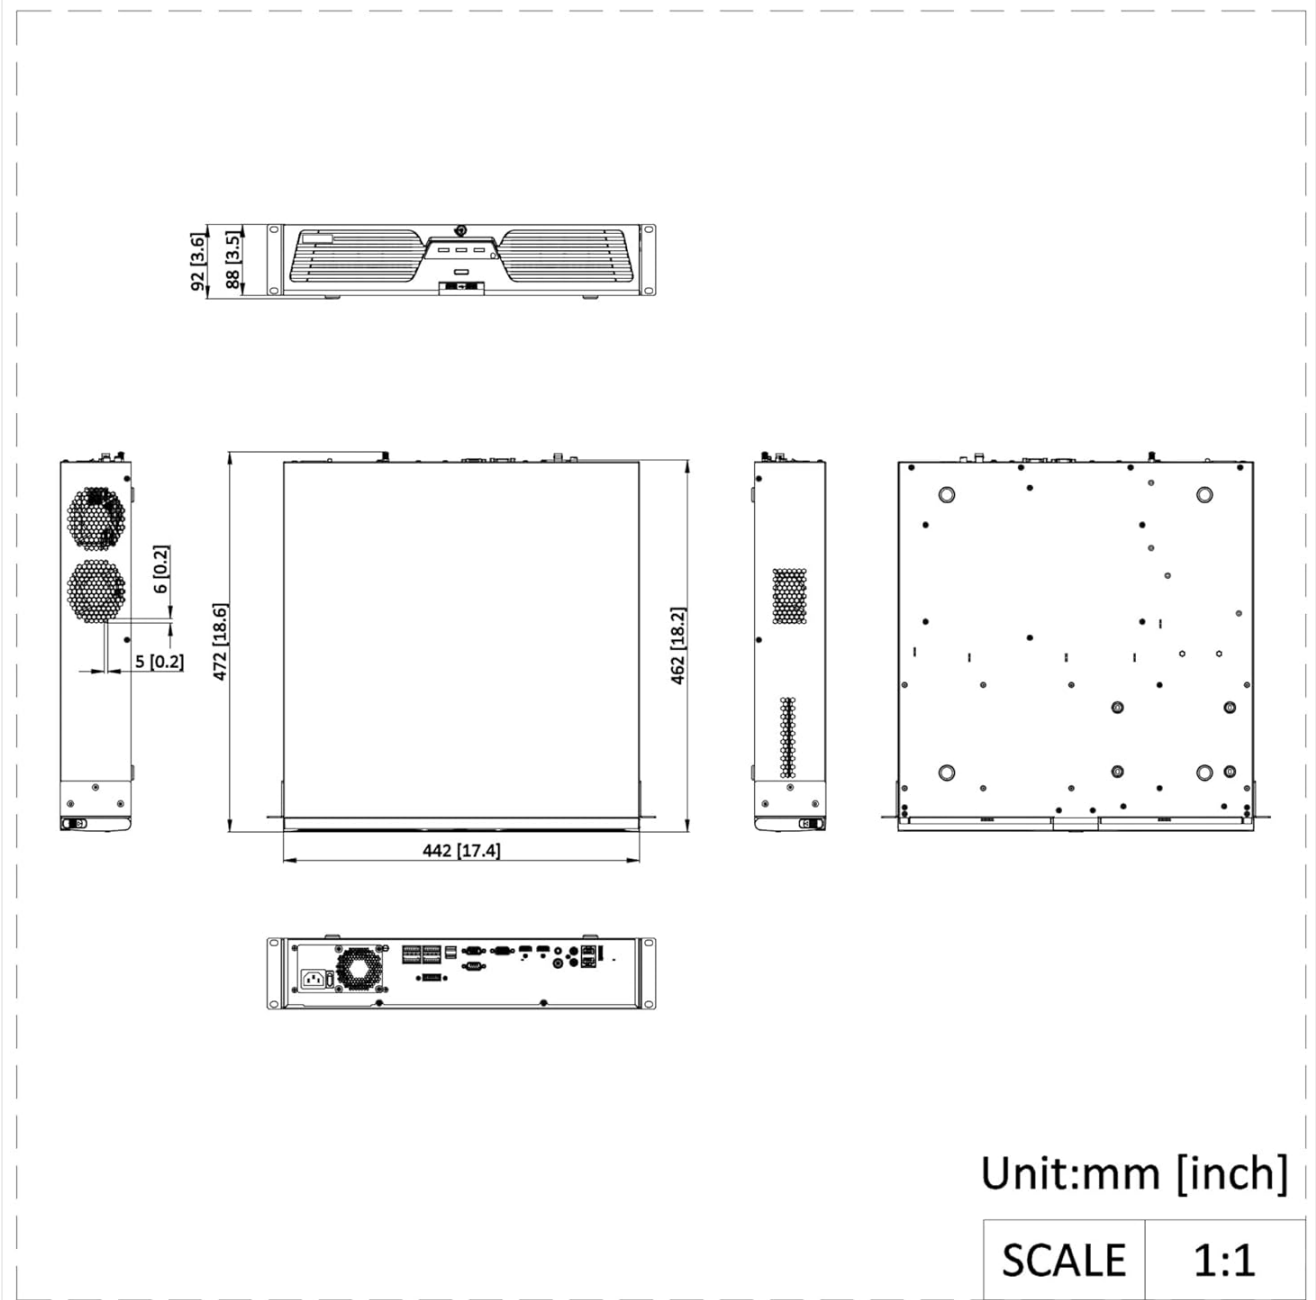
Dimensional drawing of the DS-9664NI-M8 NVR, showing measurements in millimeters and inches.
